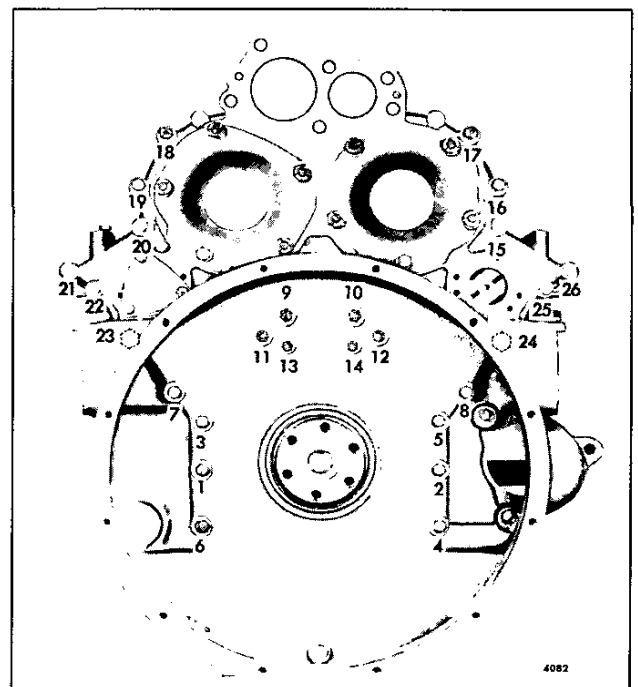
Flywheel Housing Bolt Tightening Sequence (Operation 2)—6V Engine
